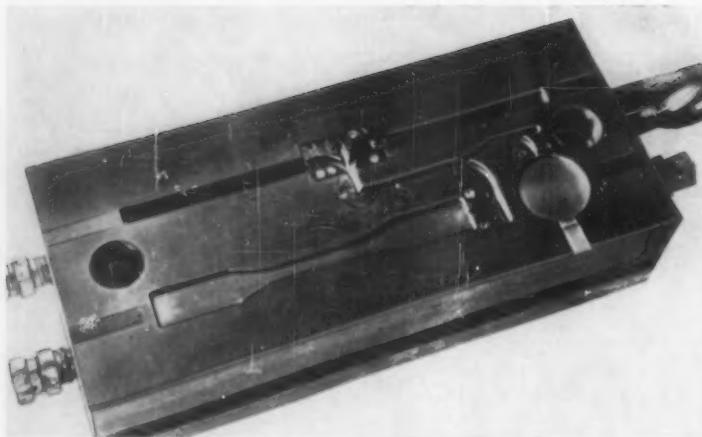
Four-cavity mold run in a 4-oz. machine was used for injection molding physical test specimens
